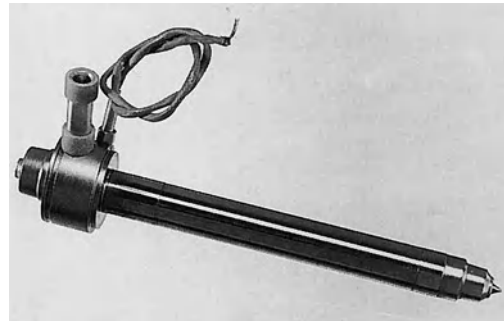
Hot-runner nozzle for injecting through the long tubular section
